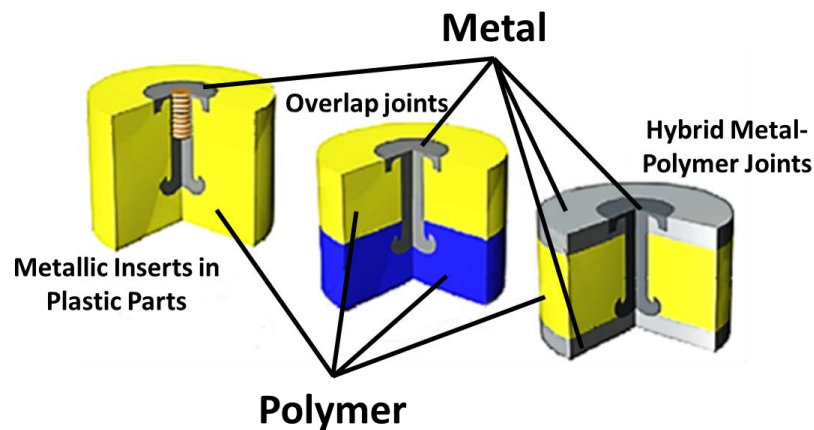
Possible Configurations of friction riveted joints. From the left to the right: metallic insert joint; overlap joint; sandwich type joint [9].
